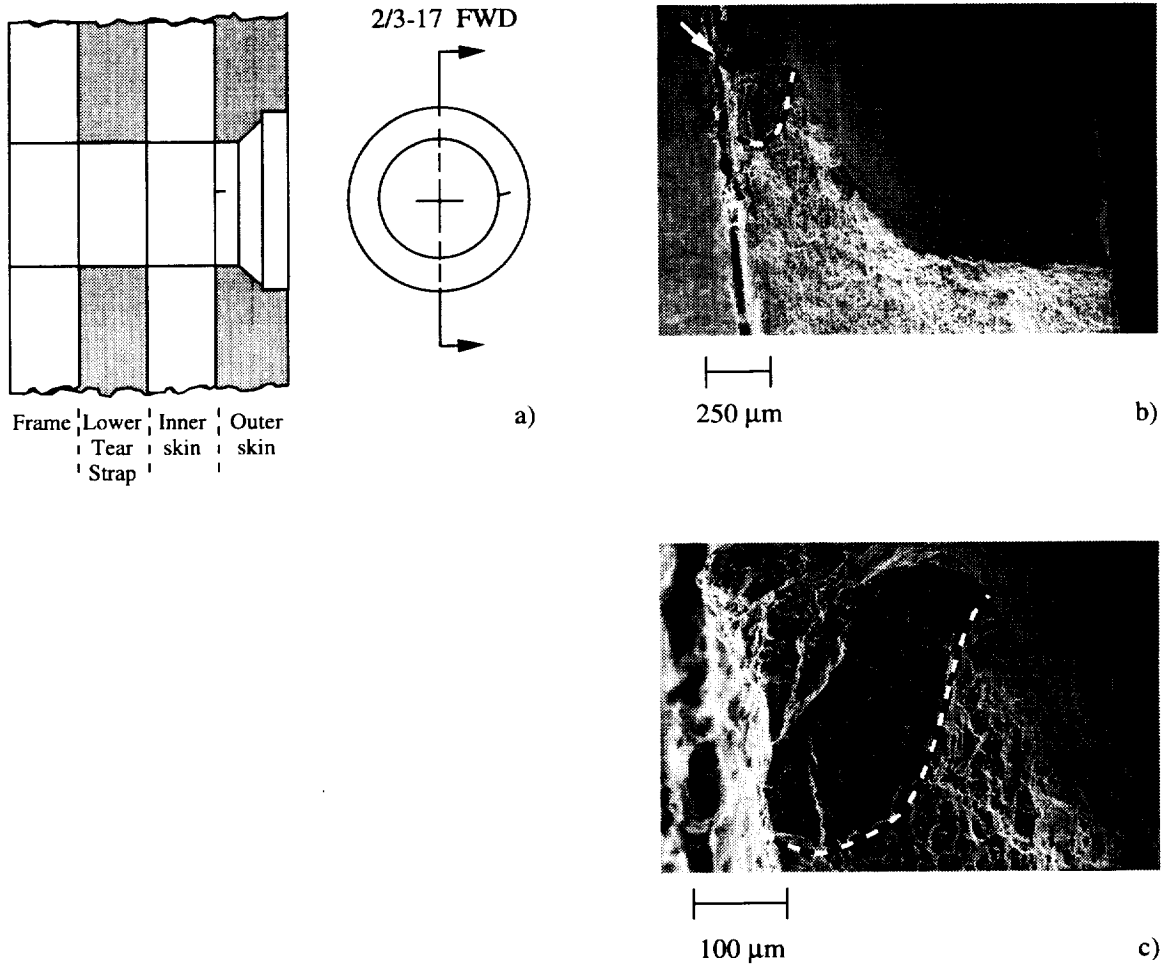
a) The schematic shows the rivet hole 2/3-17 configuration and the location of the outer skin fatigue crack oriented in the forward direction and above the 3 o'clock position. b) The SEM micrograph shows the fatigue crack fracture (arrow) surface located at the inboard corner of the rivet hole contained in the outer skin. The dashed line marks the fatigue crack front. c) The SEM micrograph shows the region marked by the arrow in Figure 8.29.b. The dashed line marks the fatigue crack front.
